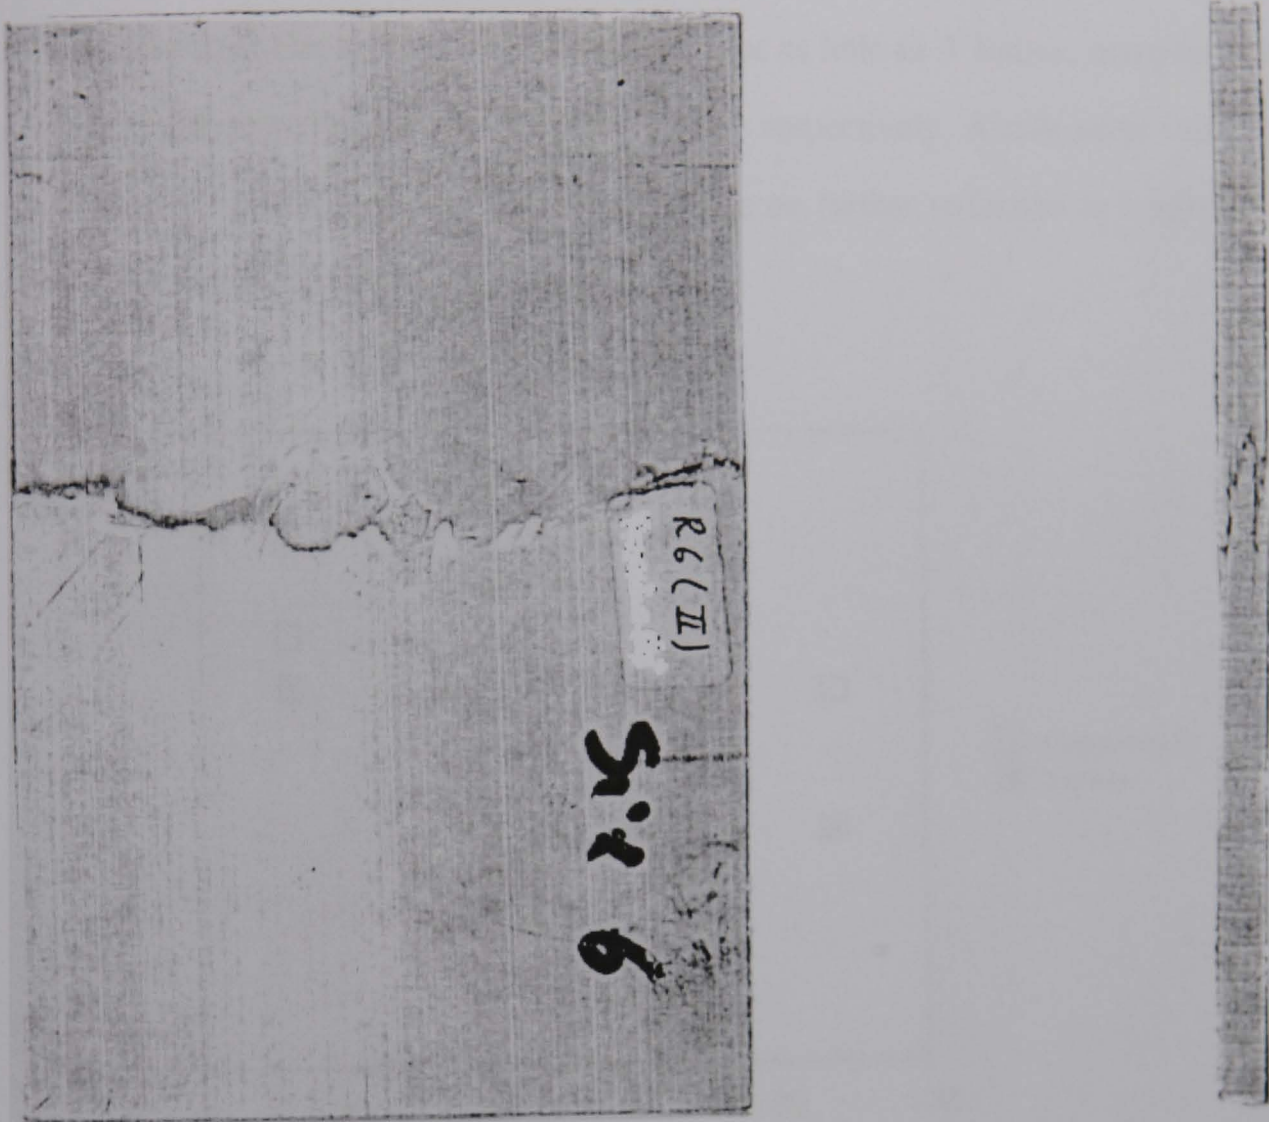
Typical fracture of residual compressive specimens after impact for 4 mm SMC in SMC with a layer of 0.6 mm stainless steel.
